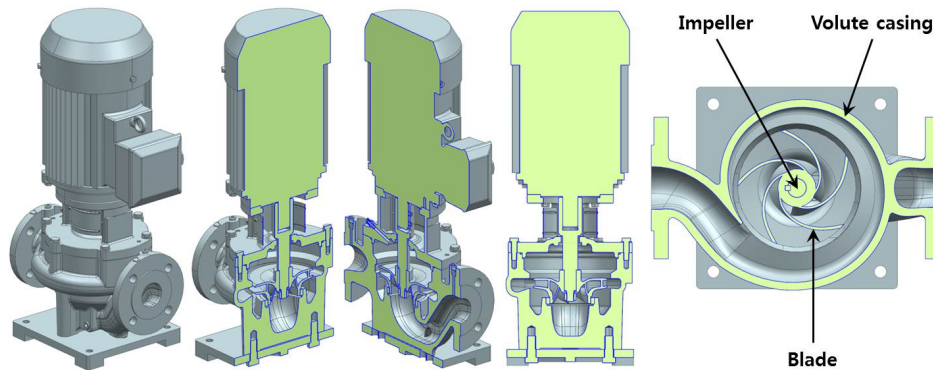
Centrifugal pump assembly showing impeller and volute casing
